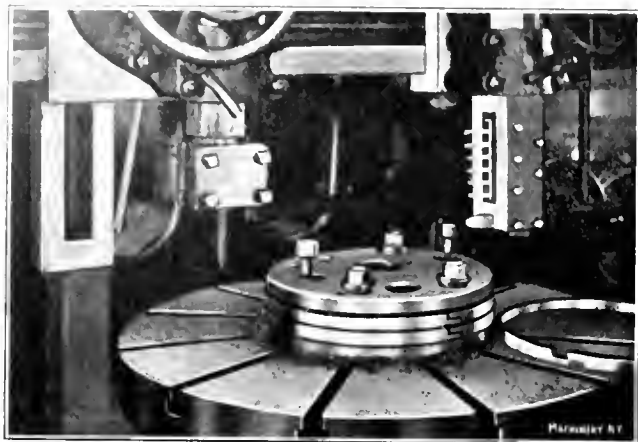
Fixtures in which the Split Packing Rings are held when taking the Finishing Cut
